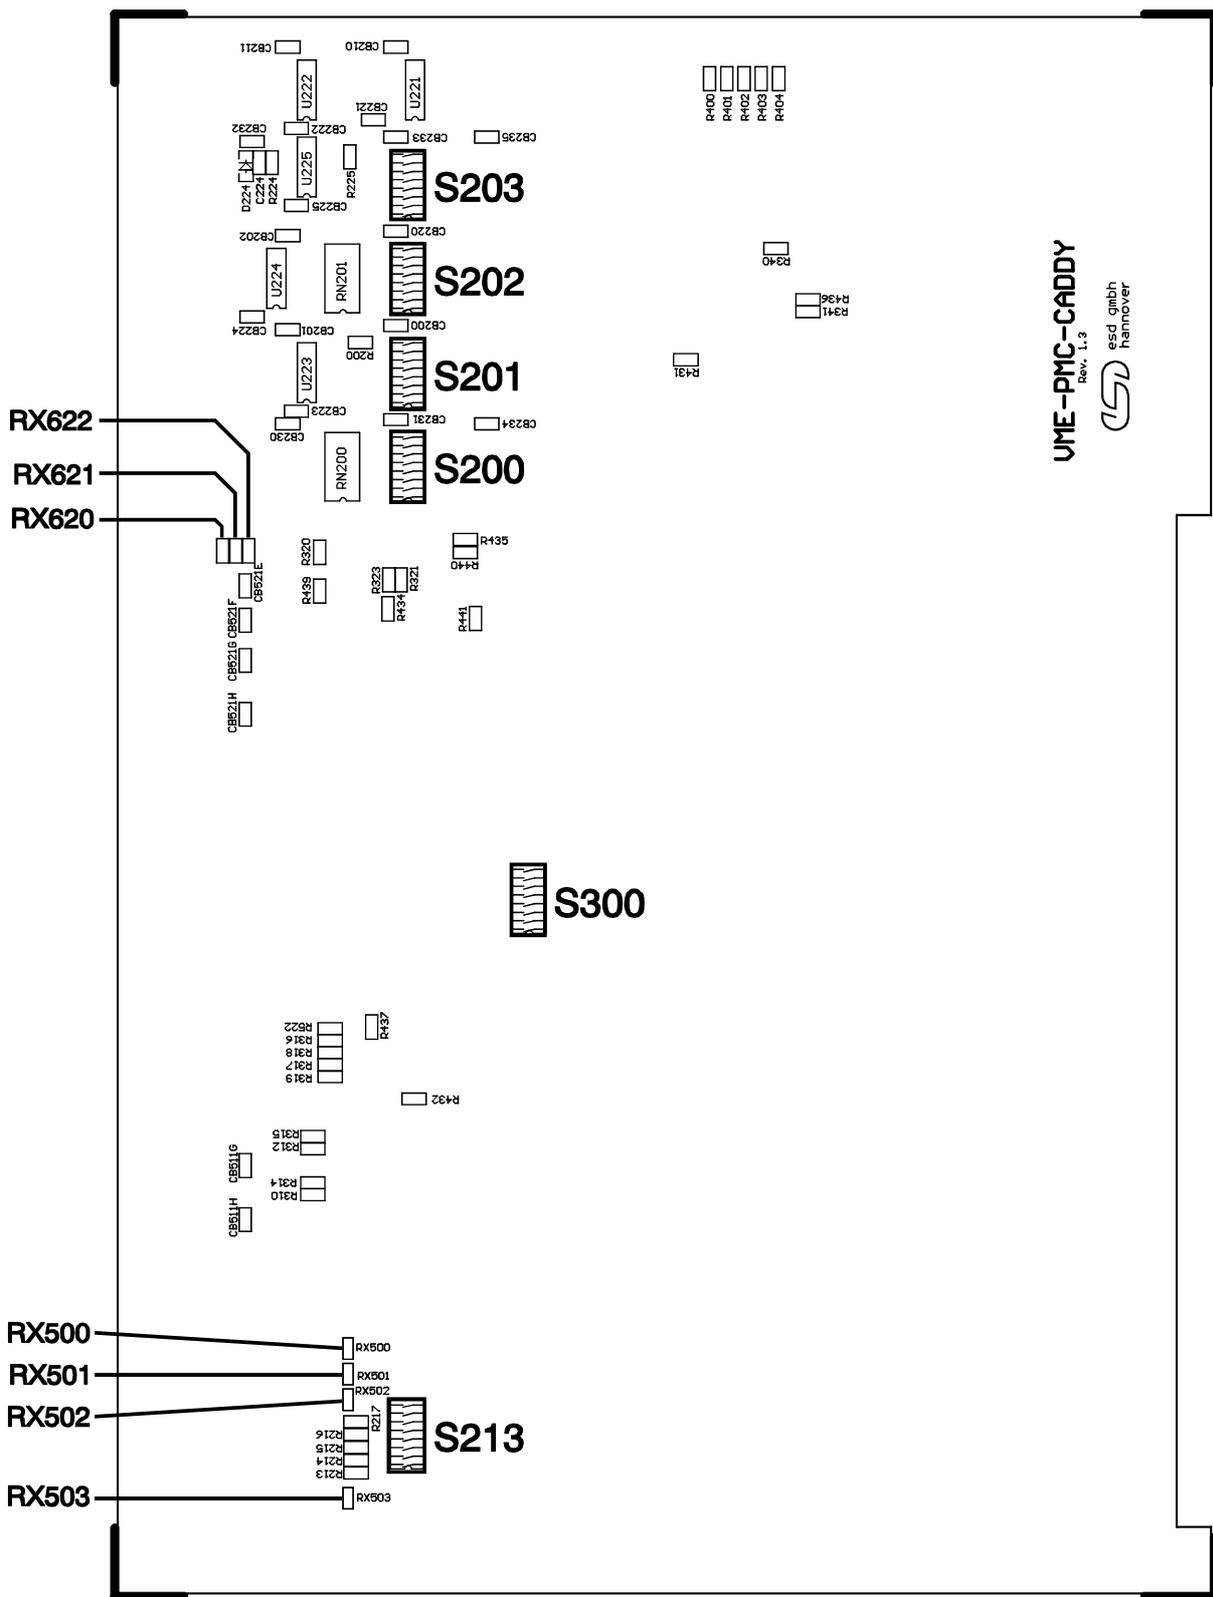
Position of coding switches and configuration resistors on the bottom layer of the PCB
